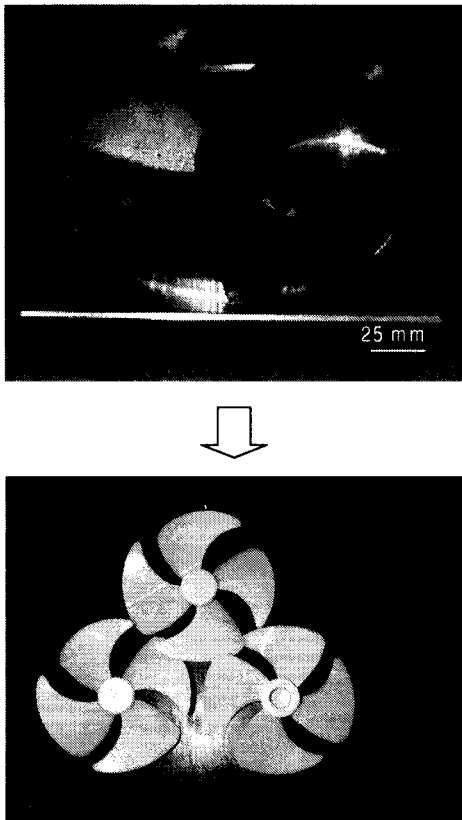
Fan insert fabricated by 3D Welding and Milling and injected plastic parts
